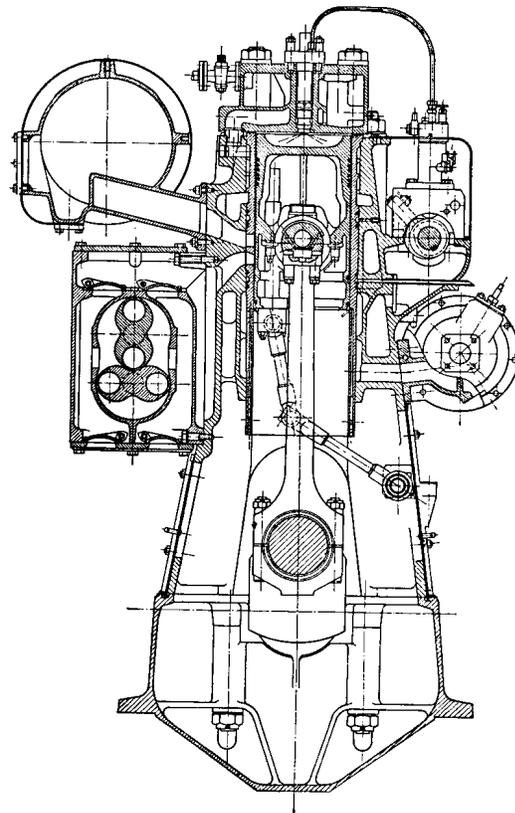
M.A.N. 11.8 in. × 16.5 in., 400 Rpm Engine with Tangential Exhaust Branches.
